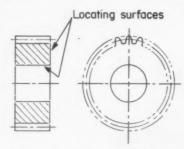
Ideal gear design has massive section with flat and parallel sides.
